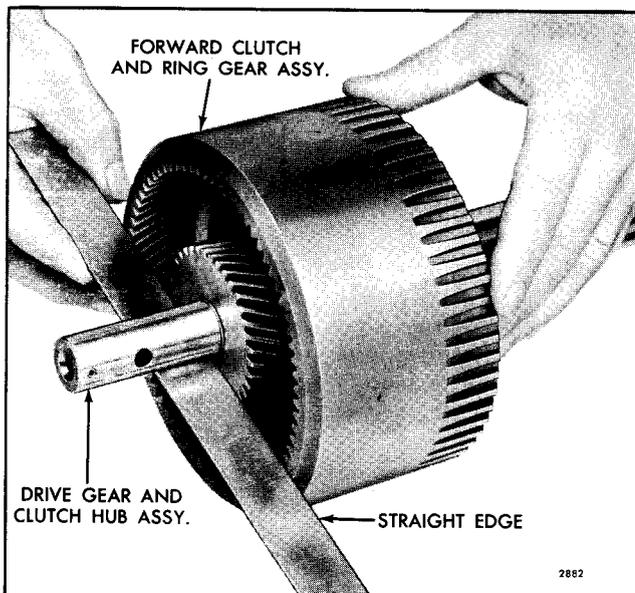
Aligning Rear Face of Drive Gear with Face of Ring Gear
